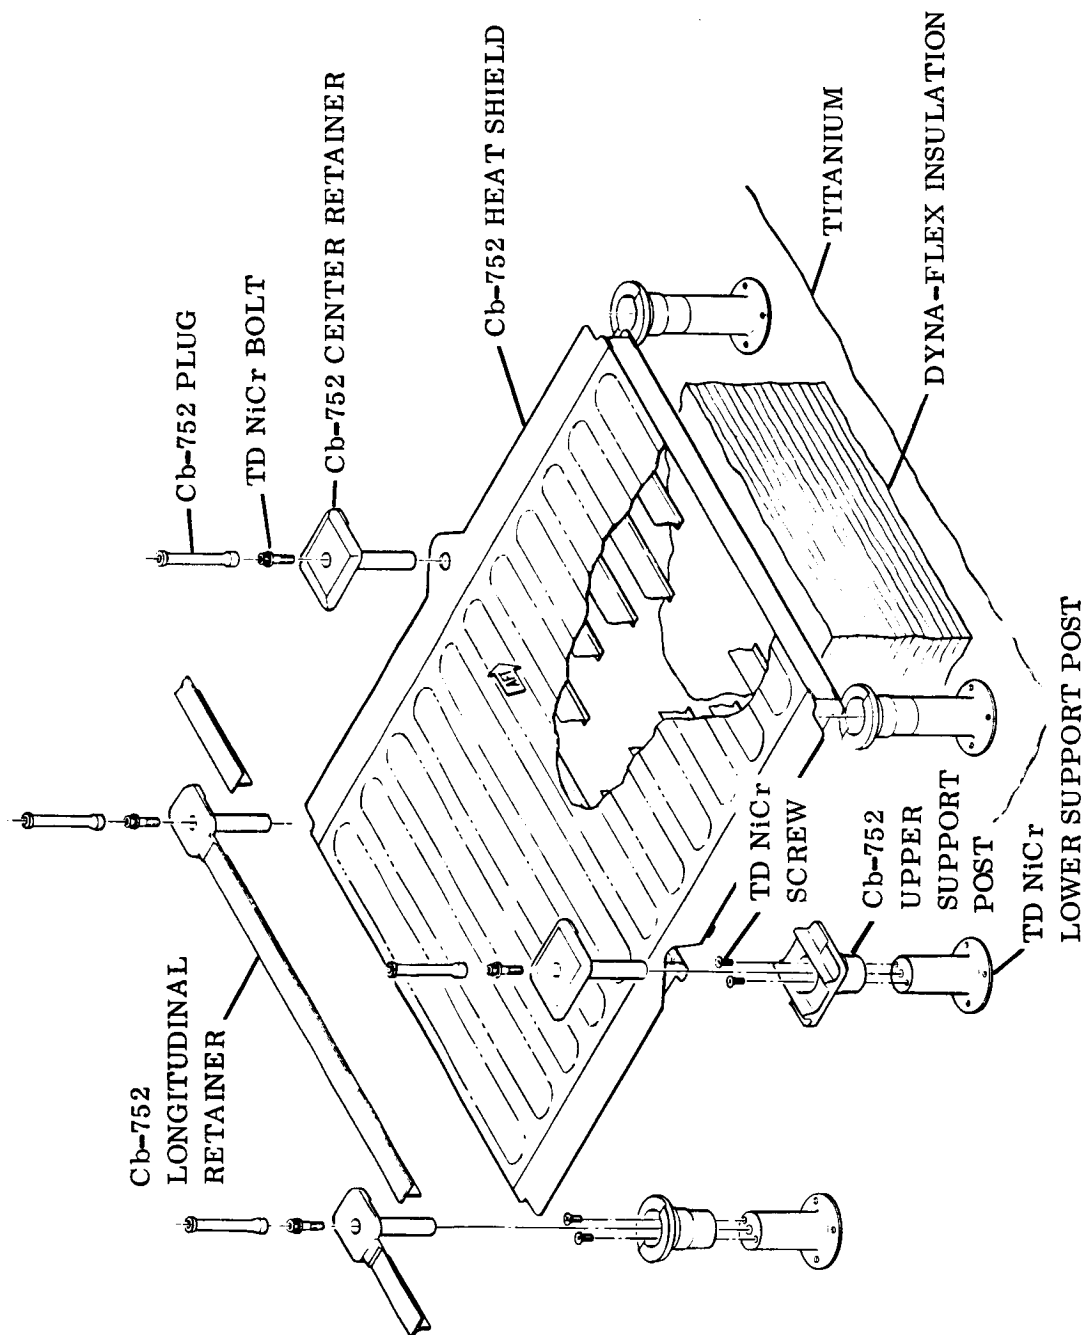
Tee-Stiffened TPS Exploded Assembly
